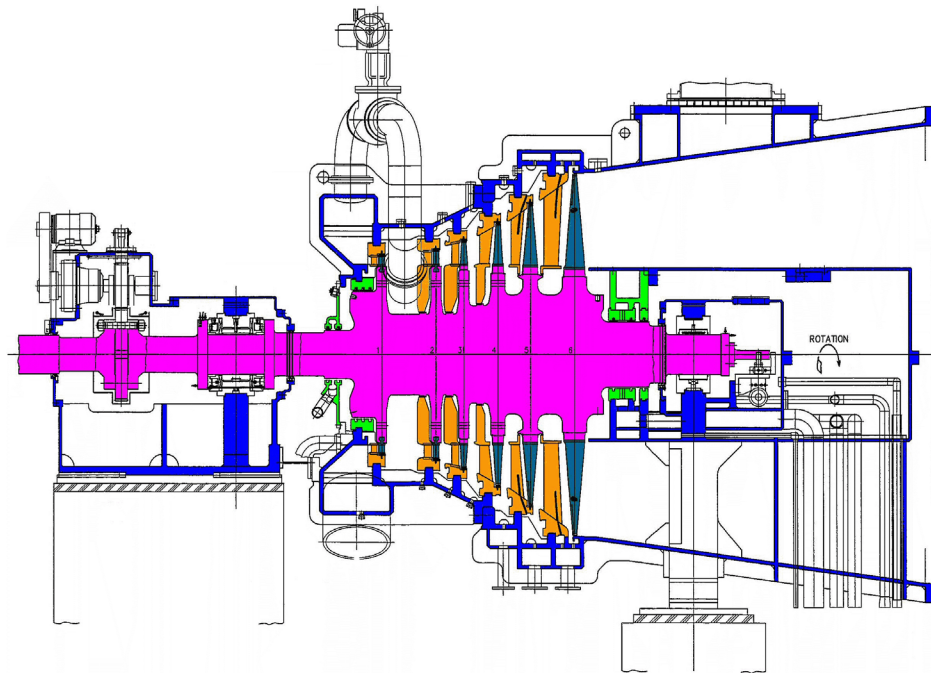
Turbine Sectional Assembly of Hellisheidi.
